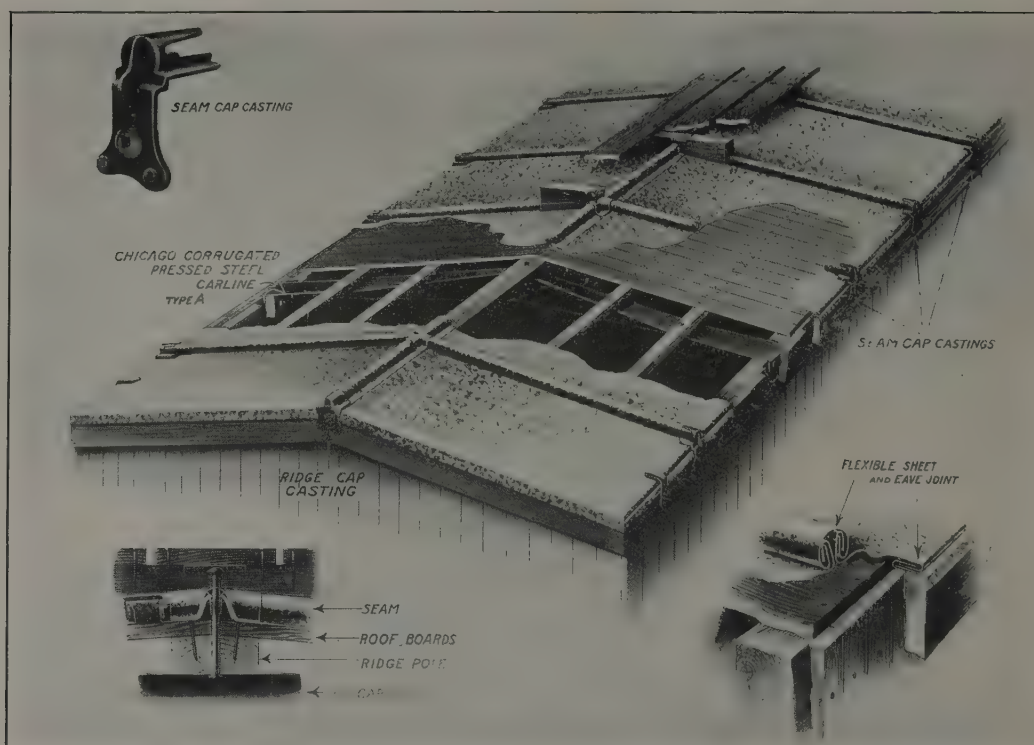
Superior Flexible Outside Metal Roof. Chicago-Cleveland Car Roofing Company
